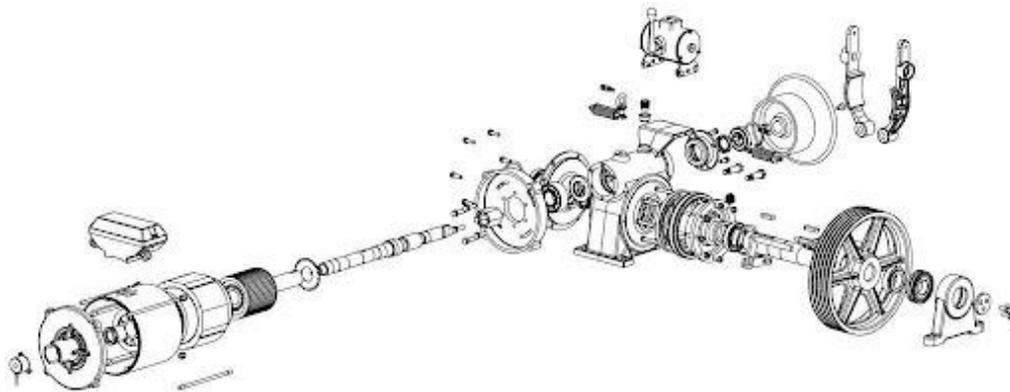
Decomposed Representation of MUGEN Machine Parts
